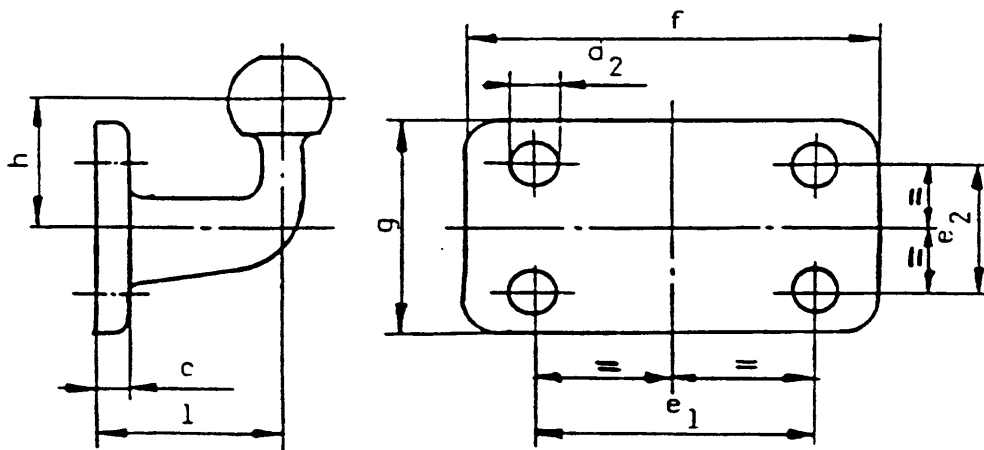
Dimensions of standard ball couplings and flange type towing brackets of Classes A50-2 and A50-3 (mm), see Table 1
